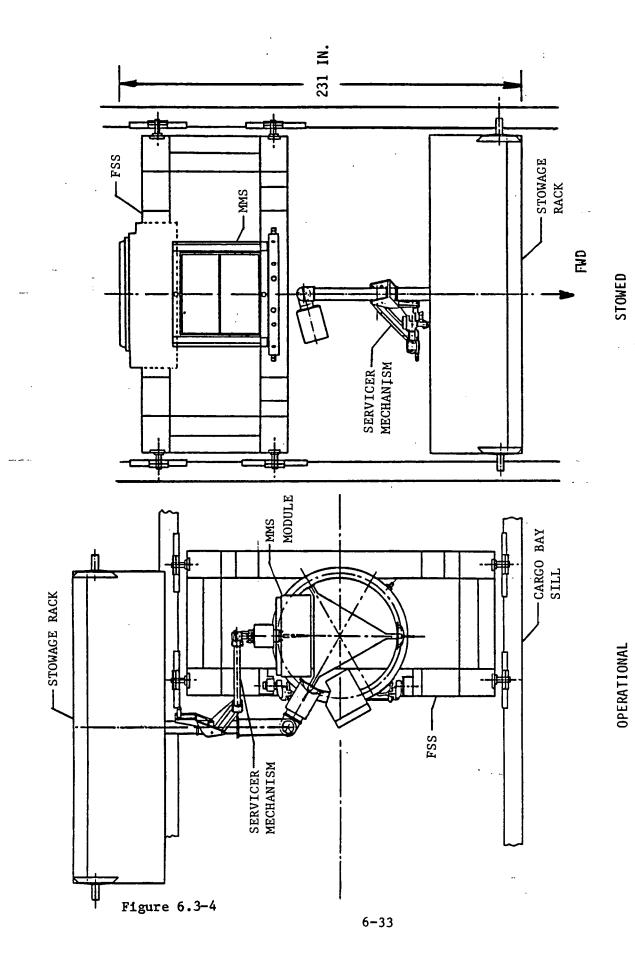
Cargo-Bay Equipment Arrangement 11
